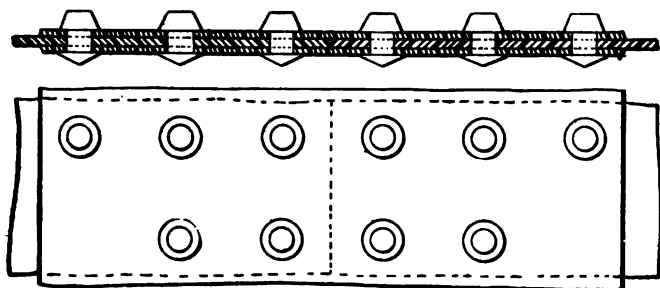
TREBLE RIVETED DOUBLE STRAP.
